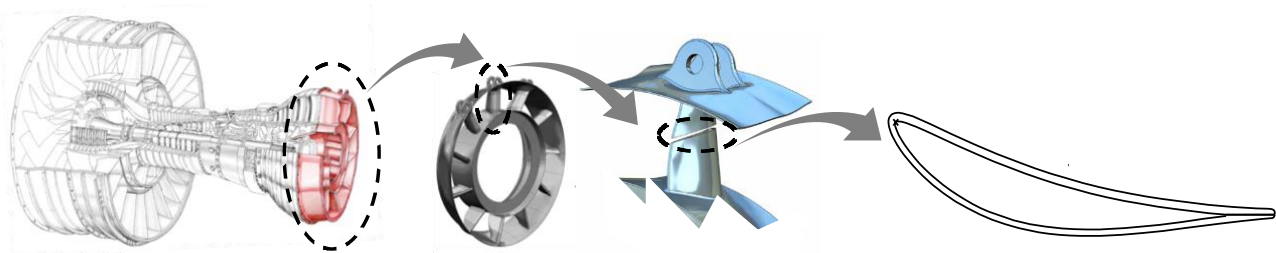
Jet engine system, Turbine Rear Structure (TRS), mid section, location of the weld and cross section of the weld
